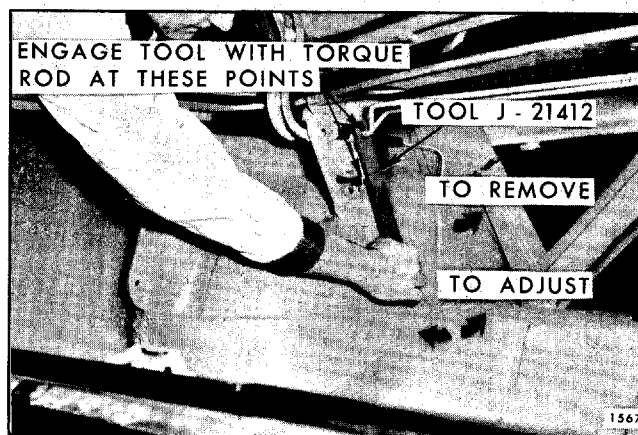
Rear Compartment Torque Rod Adjustment - "X-27, 69" Styles
